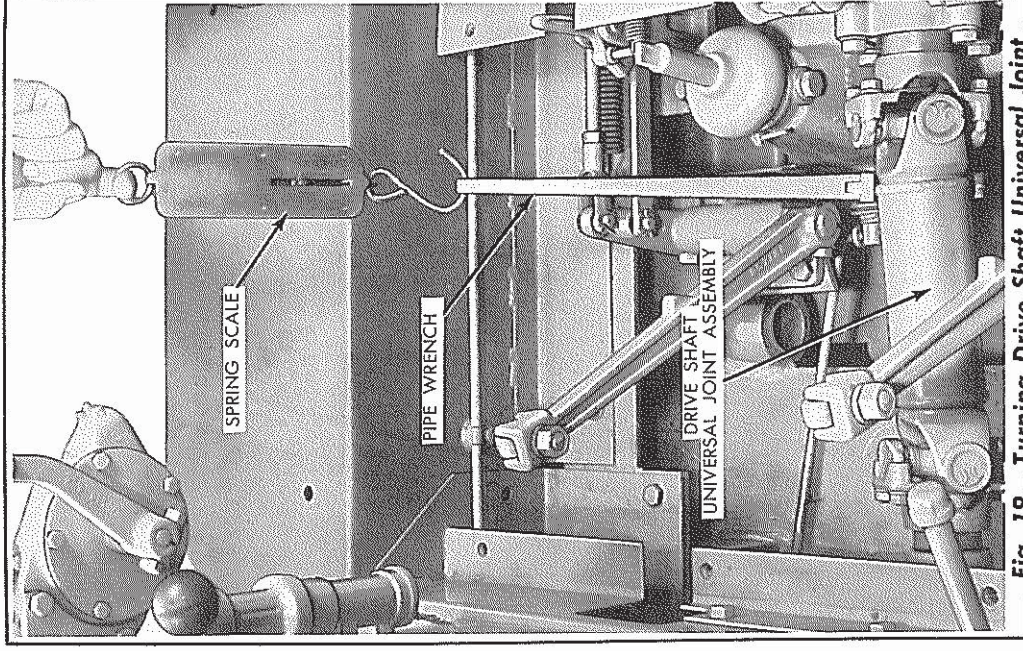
Turning Drive Shaft Universal Joint Assembly to Tighten Track Sprocket Retaining Nut
